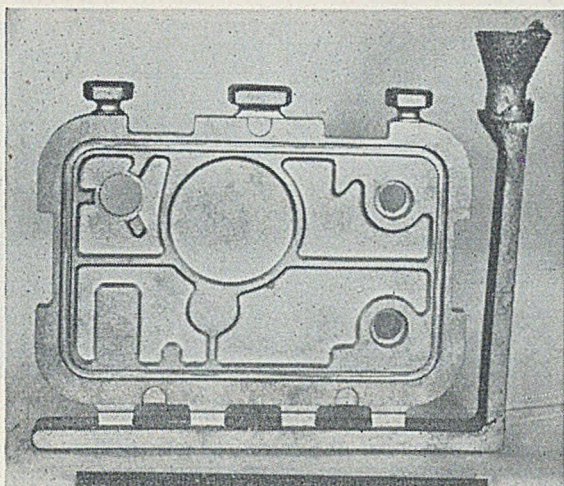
Mounting Panel (approx. 12 by 9½ in.) As-cast.
